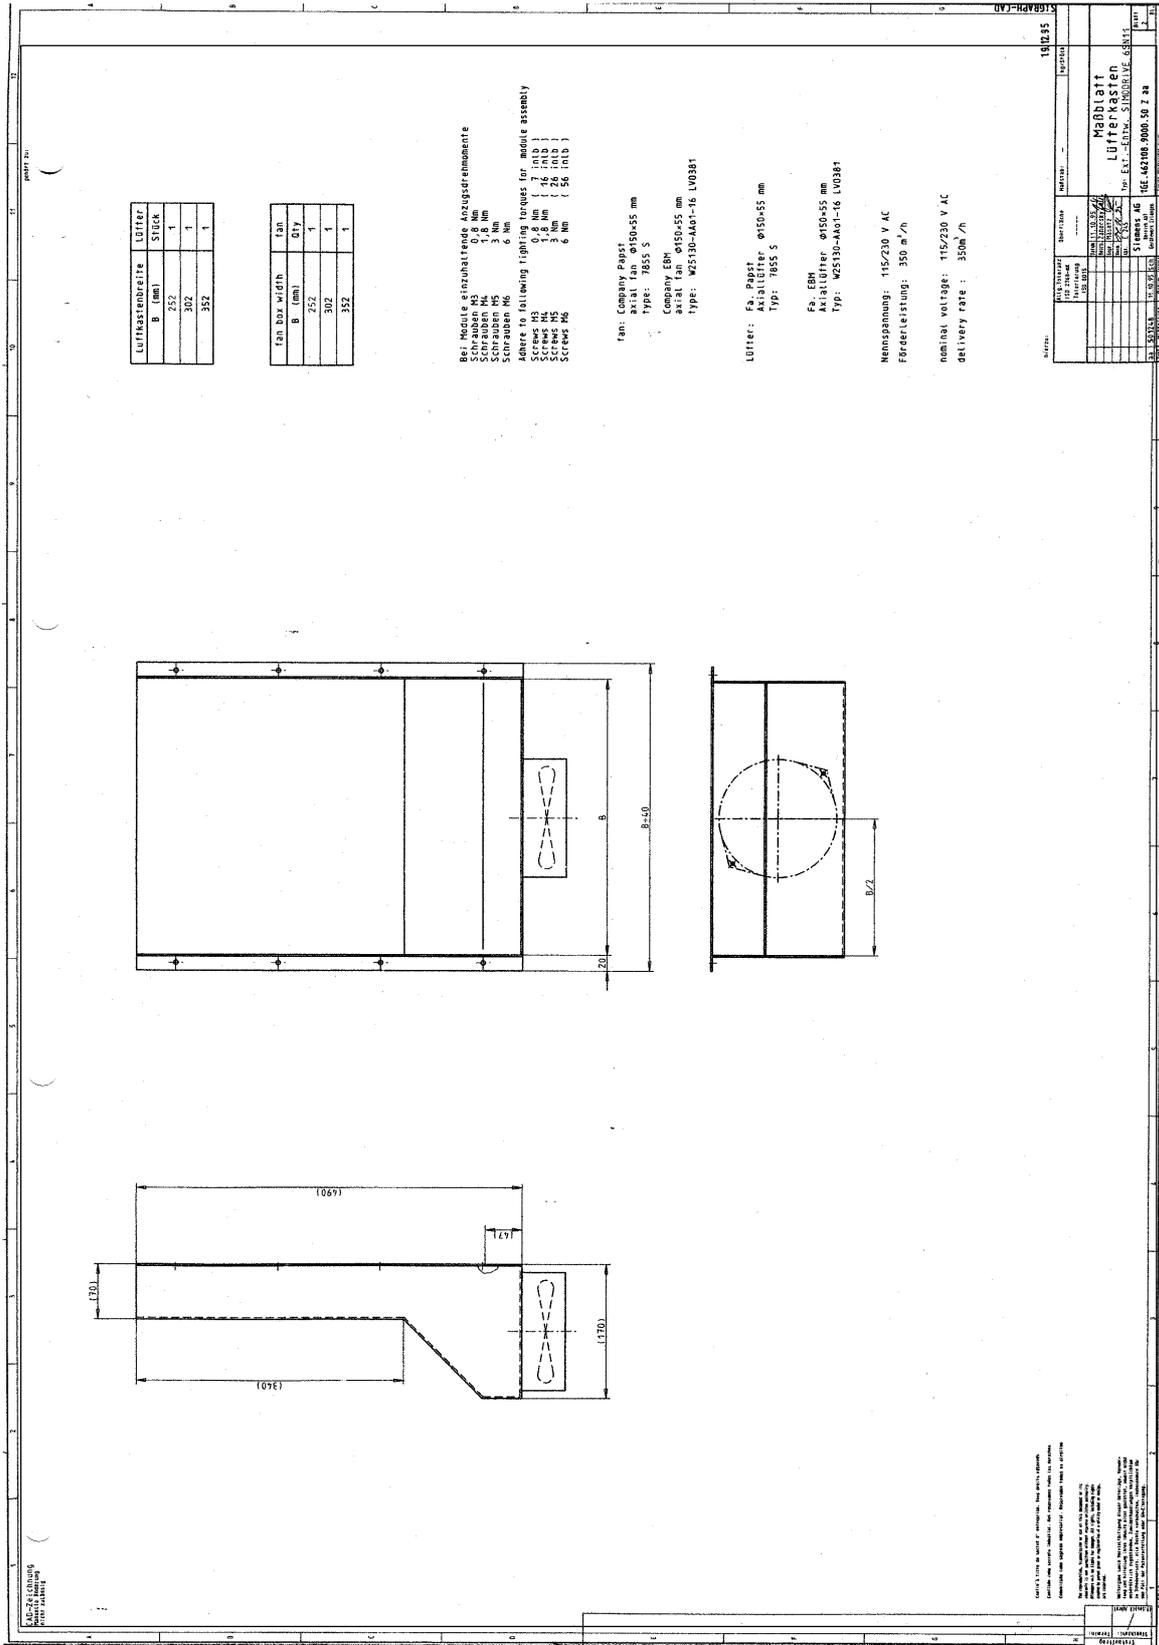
External cooling, 2GE.462118.9000.00 MB aa, Sheet 11
